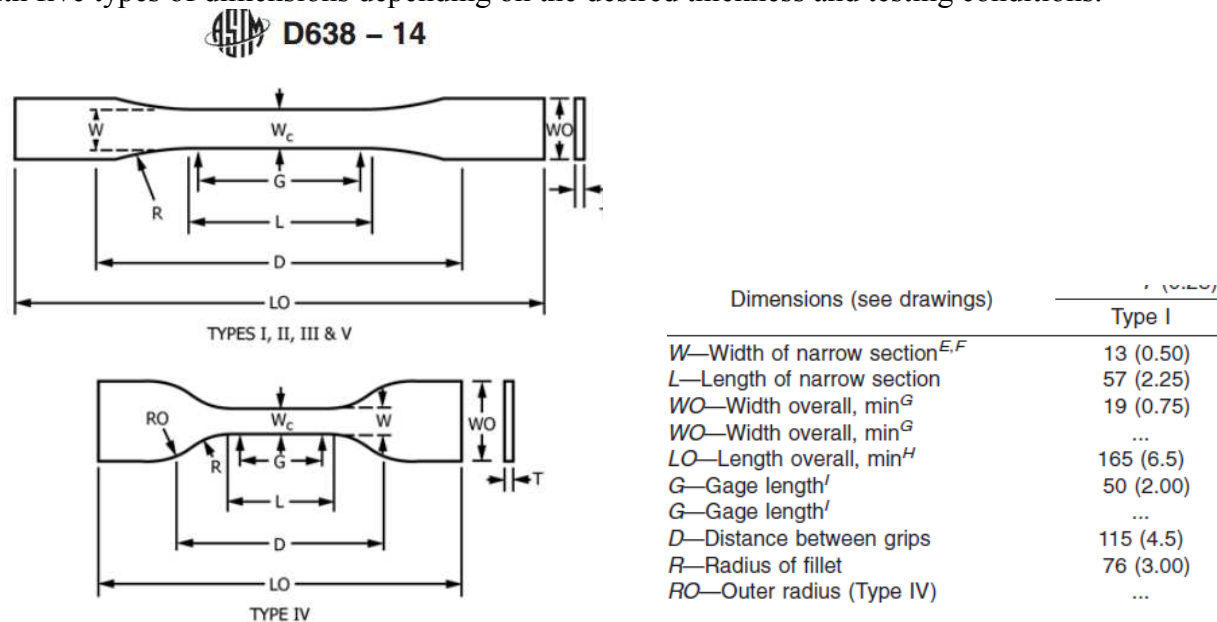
Dimension and shape Type 1 specimen from ASTM [20]
